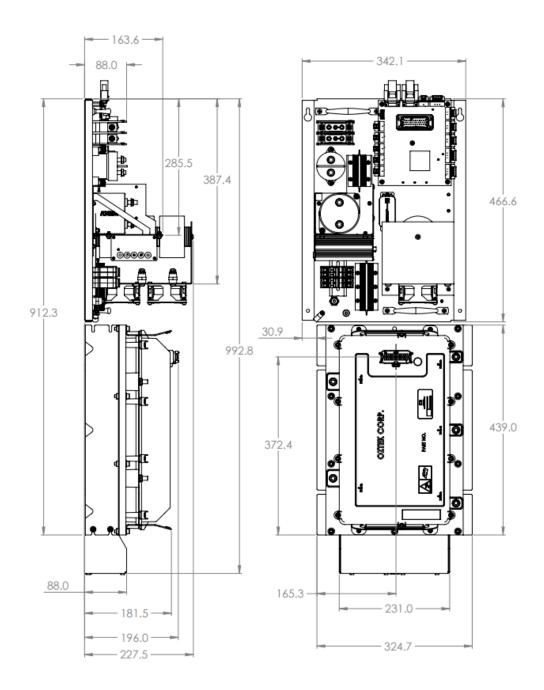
11445-02 Product Dimensions (in millimeters)
